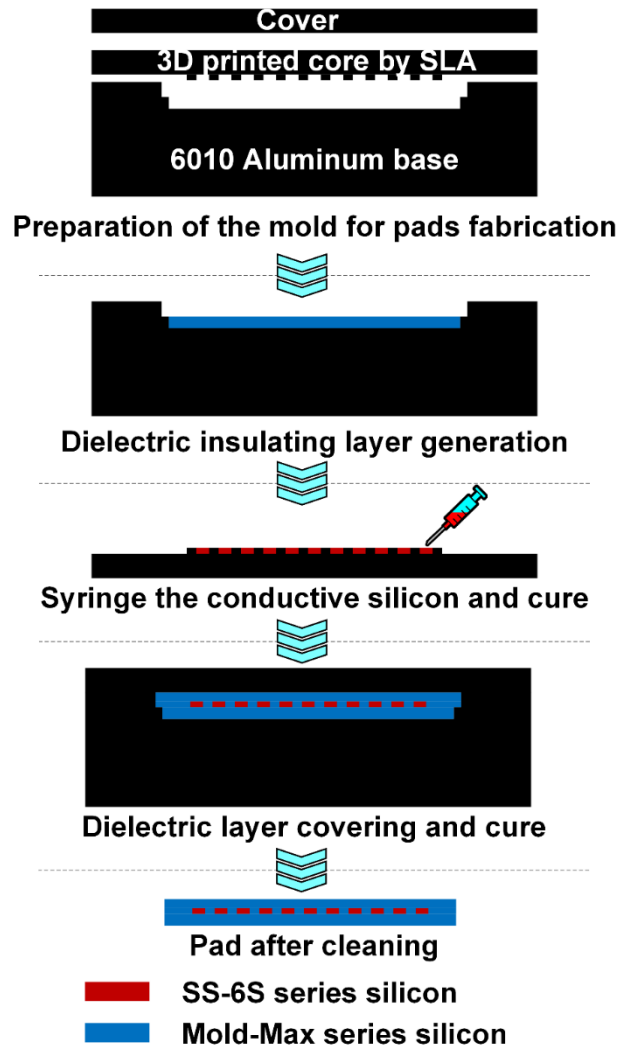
Pad manufacture by the molding method [14][73][74]
